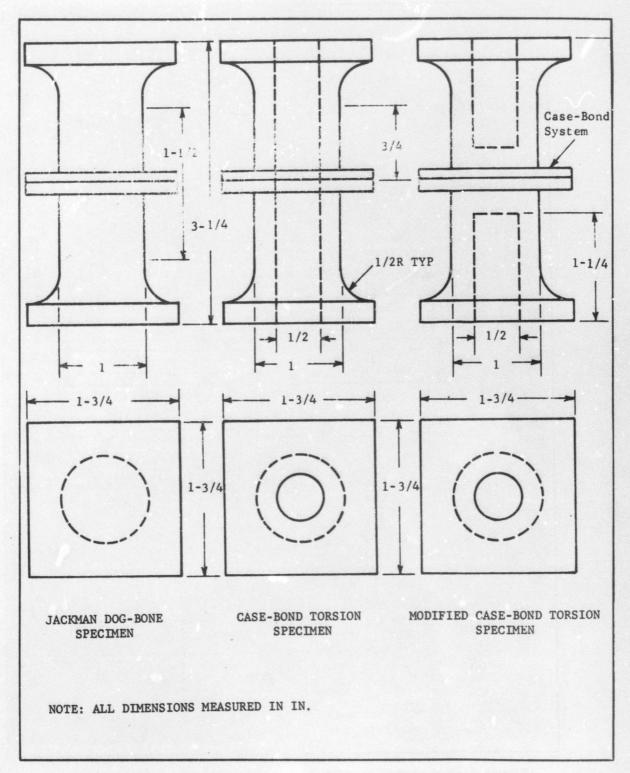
A. Detailed Specimen Machining Plan (Grain No. 1)
